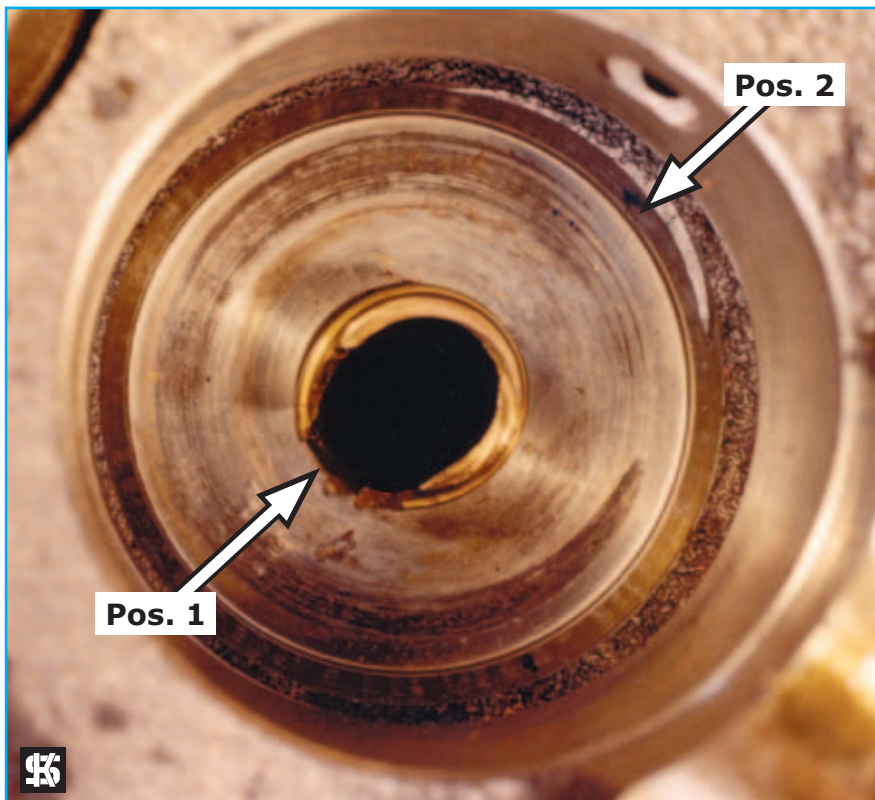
Valve guide damage, Eccentric wear on the valve guide caused by bending stress of the valve stem.
